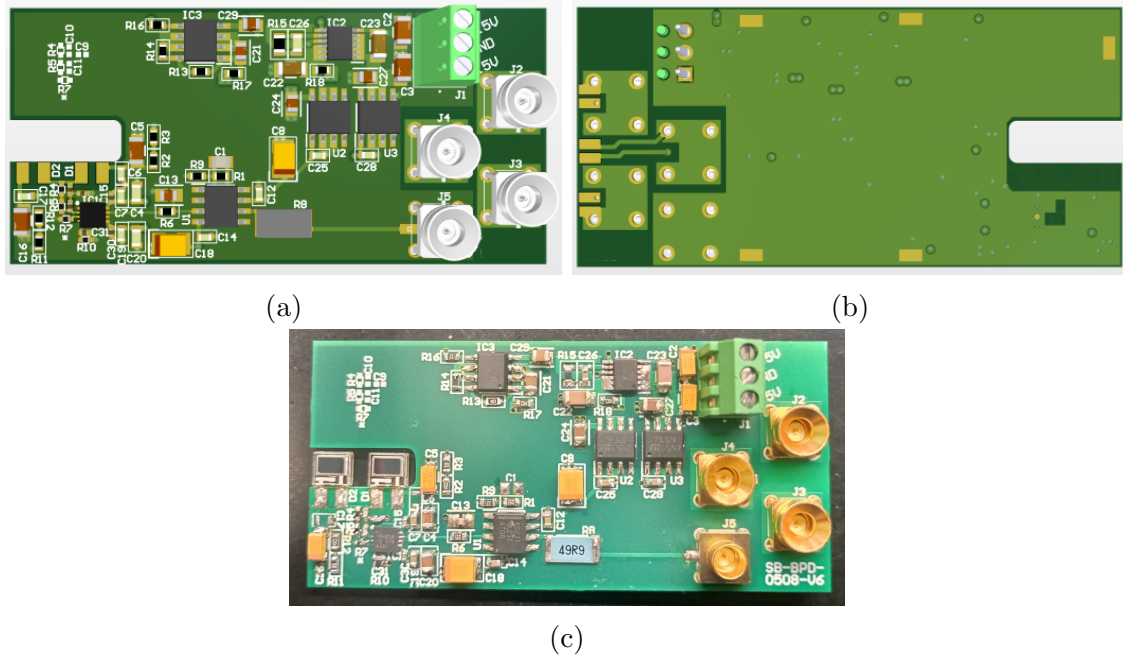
PCB board design of the improved balanced photodetector design with (a) the front and (b) back design in the design program shown. (c) An image of the soldered balanced photodetector.
